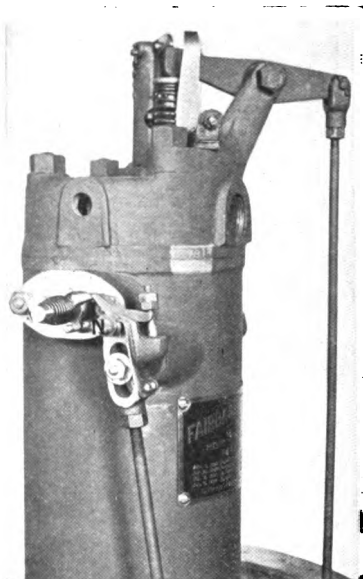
Fairbanks-Morse Igniter Operating Mechanism.
